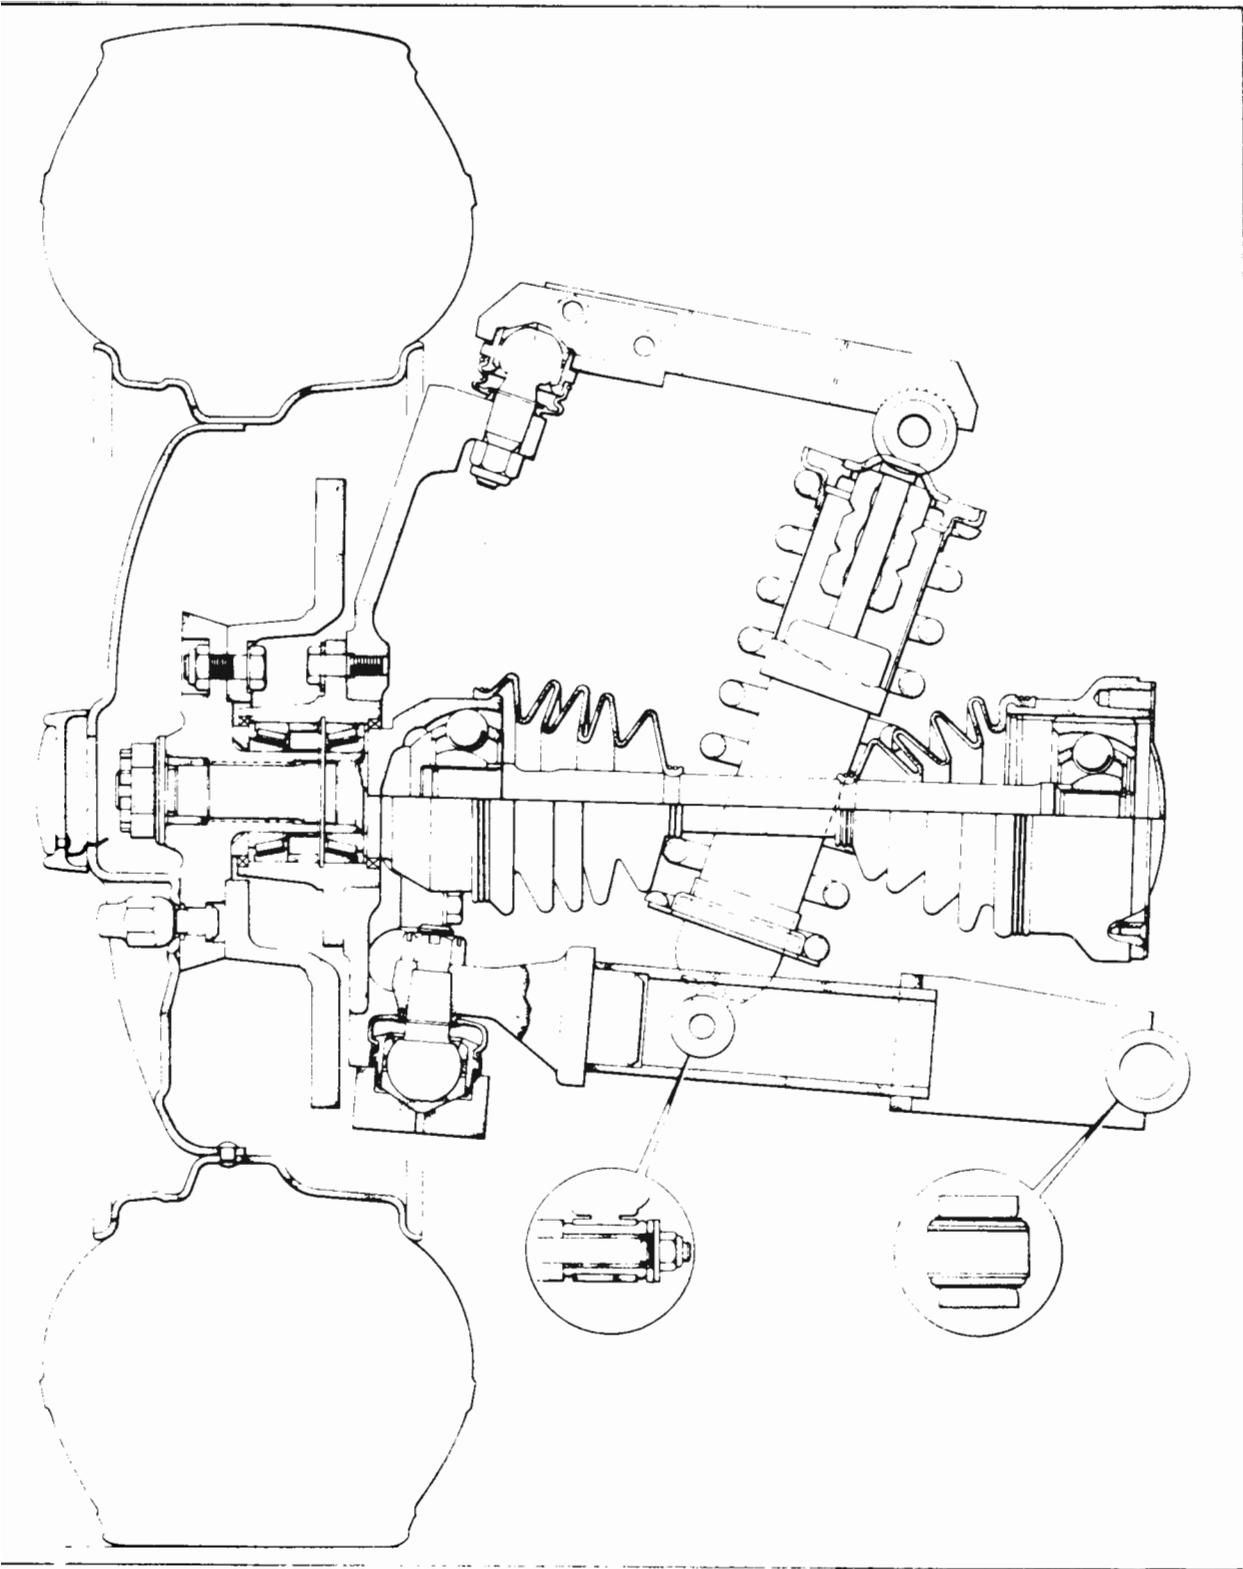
FRONT SUSPENSION - CROSS SECTION
